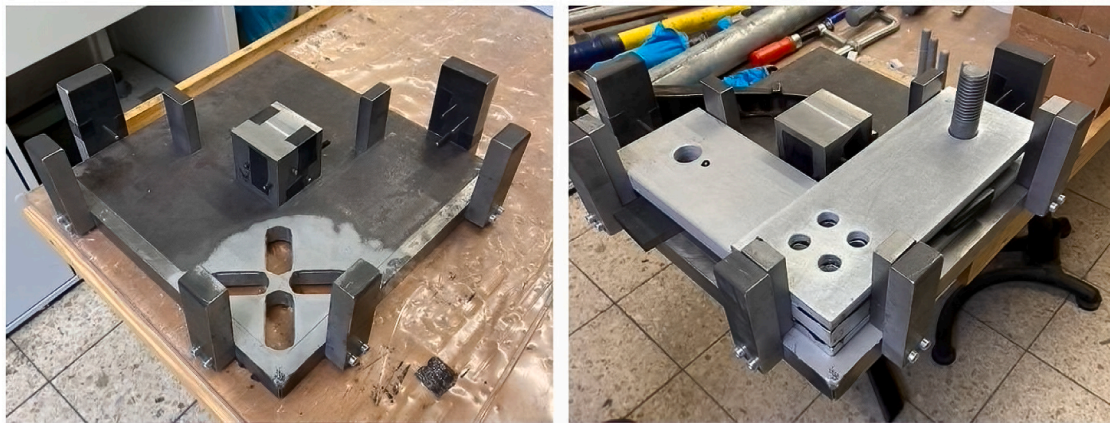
Manufacturing fixture shown without and with inserted adherents.
